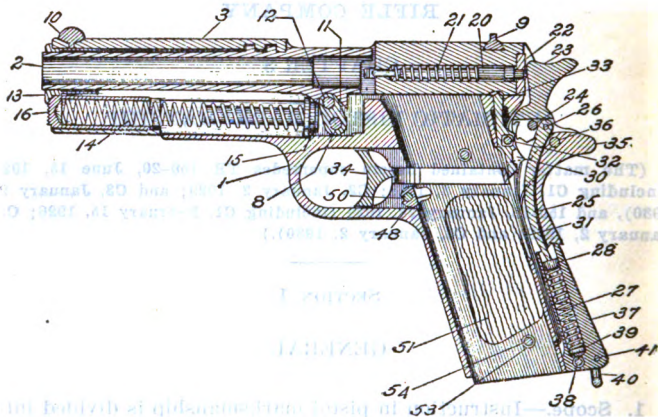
Longitudinal section of pistol, showing component parts in assembled position
